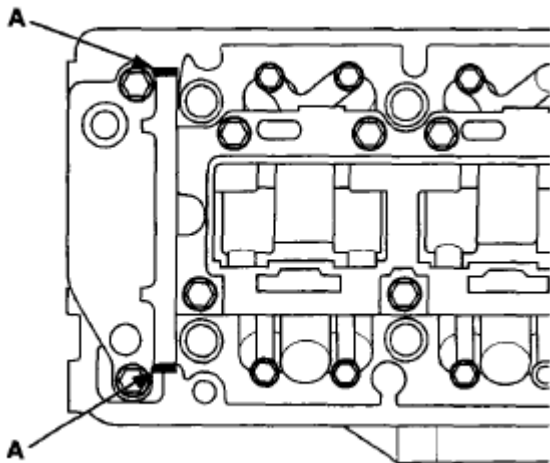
Identifying Rocker Shaft Holder Mating Area
